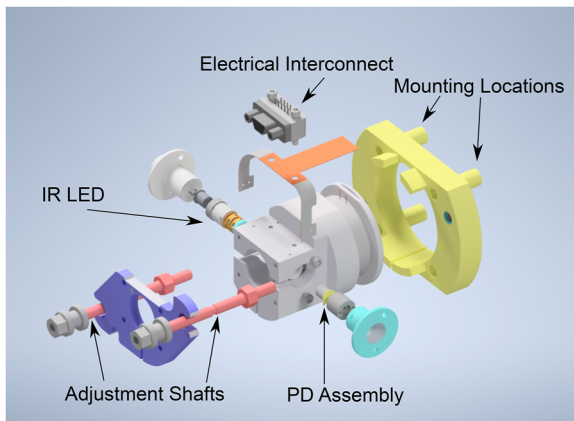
An exploded view of a BOSEM highlighting the key components.
